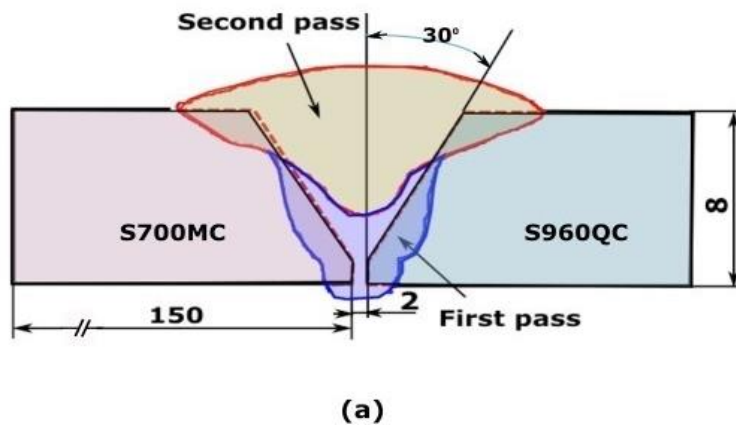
Cross-section of the weld showing weld passes and groove geometry.
